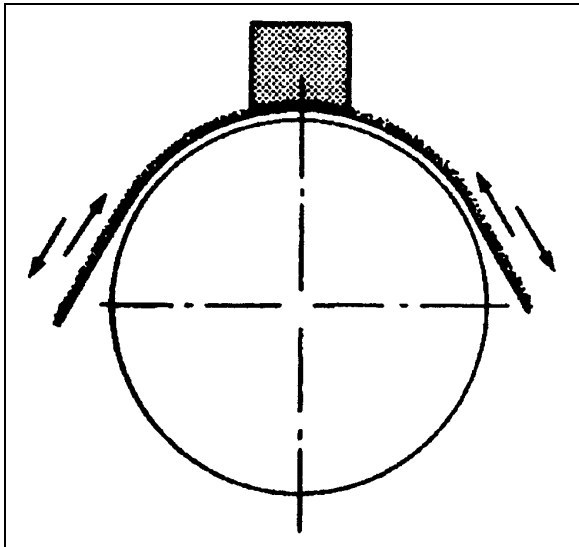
PROPER GRINDING TECHNIQUE 22317
